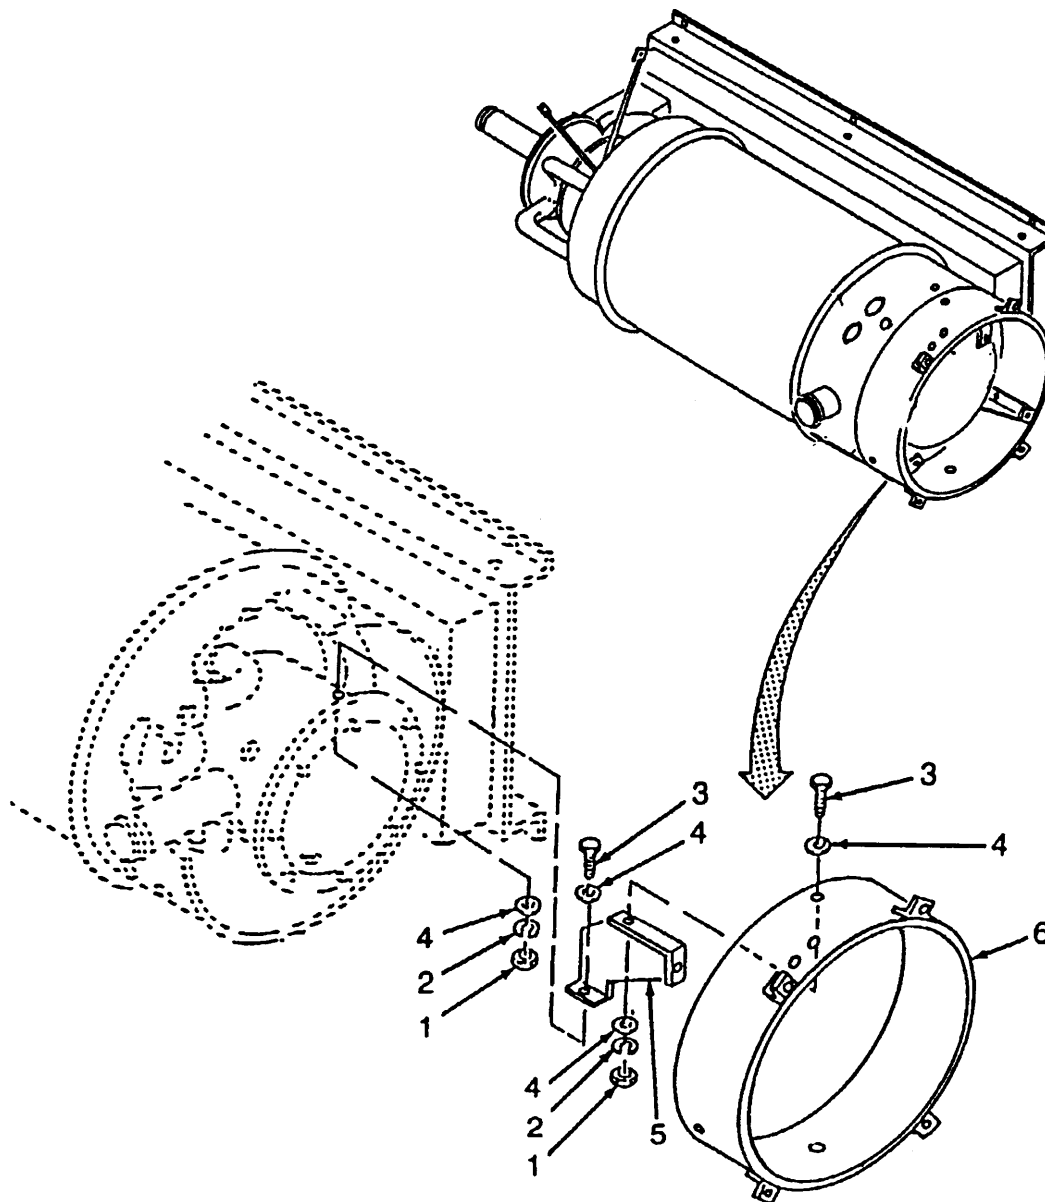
Heat Exchanger, (Model H120) Disassembly
